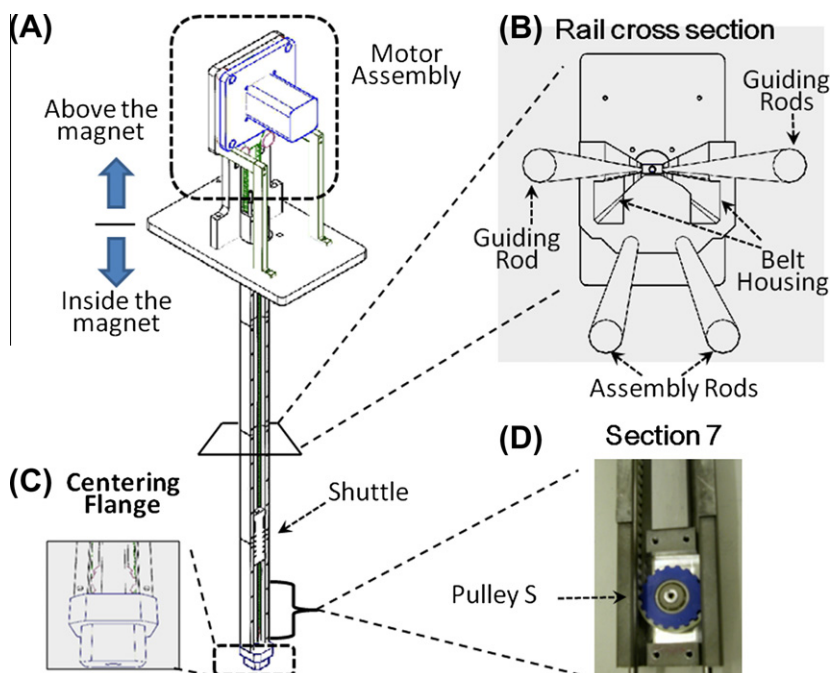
(A) Schematics of the shuttle assembly. (B) The cross sectional view of the rail. (C) An expanded view of the centering flange at the bottom of the rail (8th piece of the rail). (D) Photograph of the 7th piece of the rail which has a flattened base to accommodate the small pulley S such that the pulley is coplanar with the timing belt. (For interpretation of color in figure, the reader is referred to the web version of this article.)
